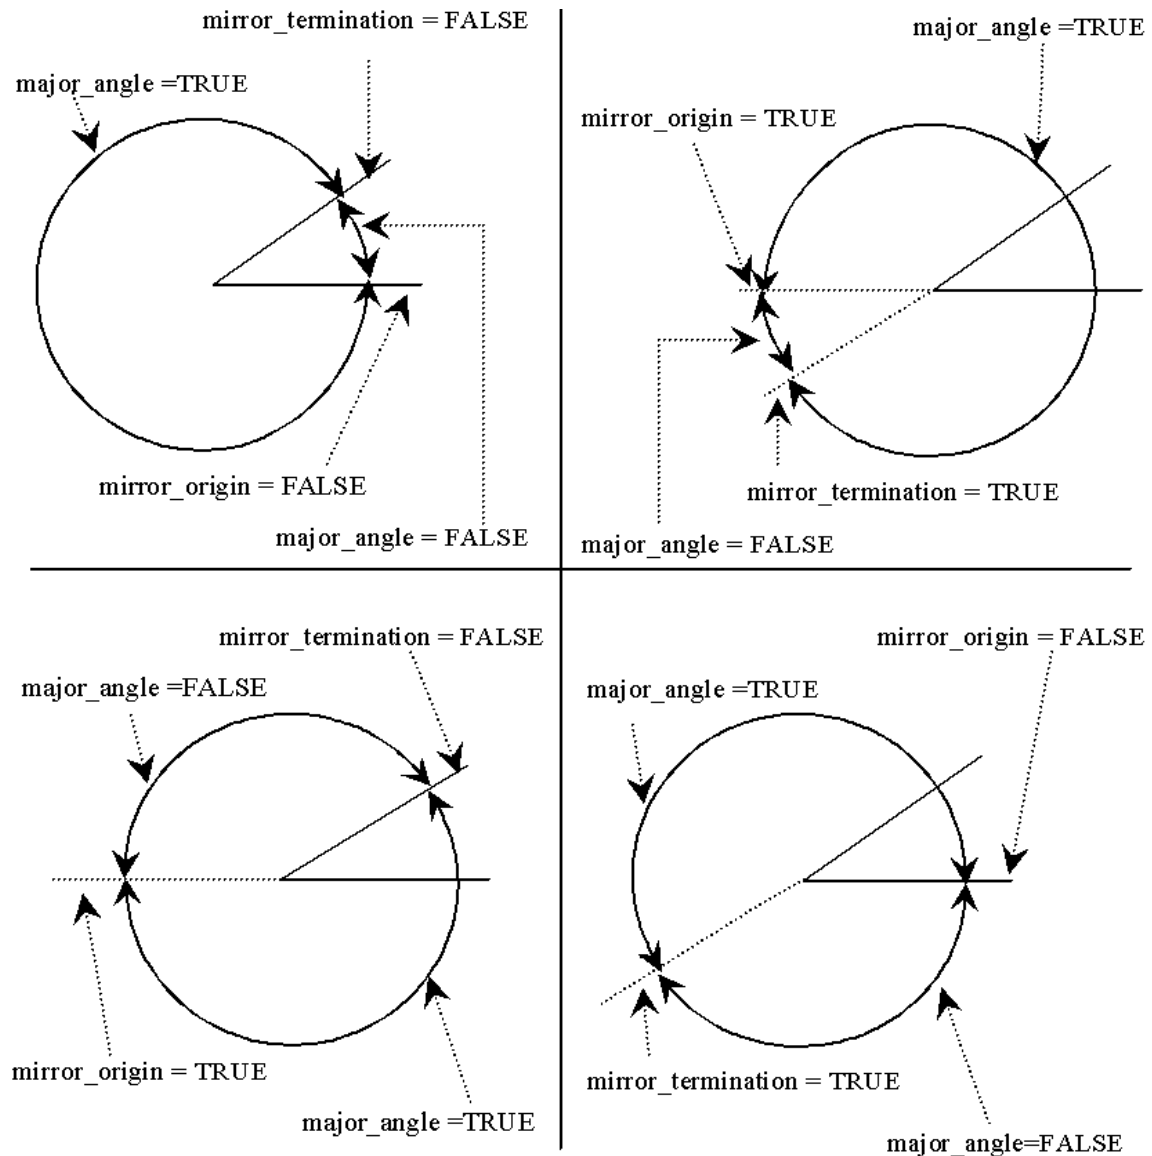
Angular_dimension_tolerance attribute usage
